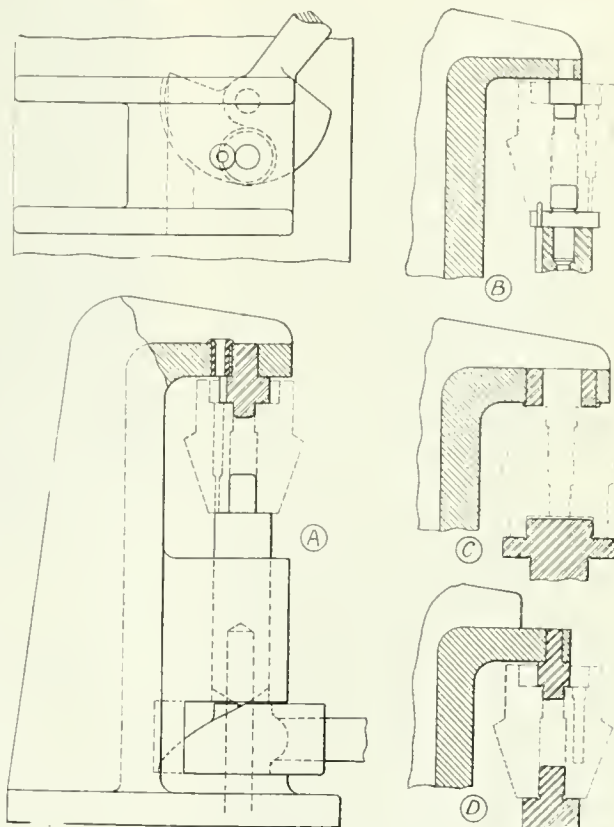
FIXTURE FOR DRILLING AND COUNTERBORING FUSE HOLES.
